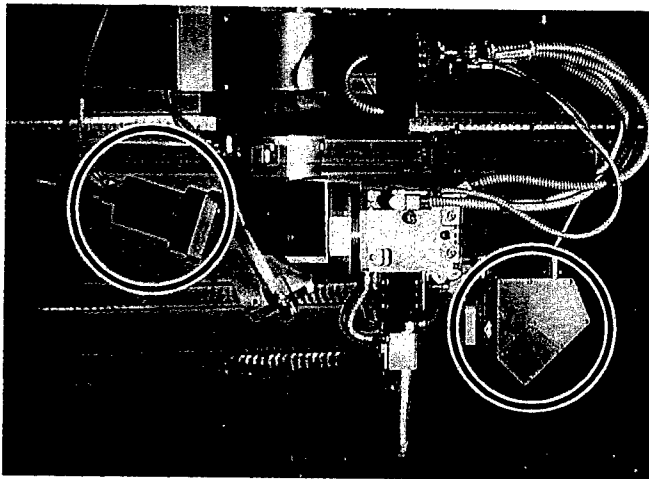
Processing head for CO₂-Laser beam welding with integrated adaptive optics (left) and DisCo (Distance Control) Sensor (right)
